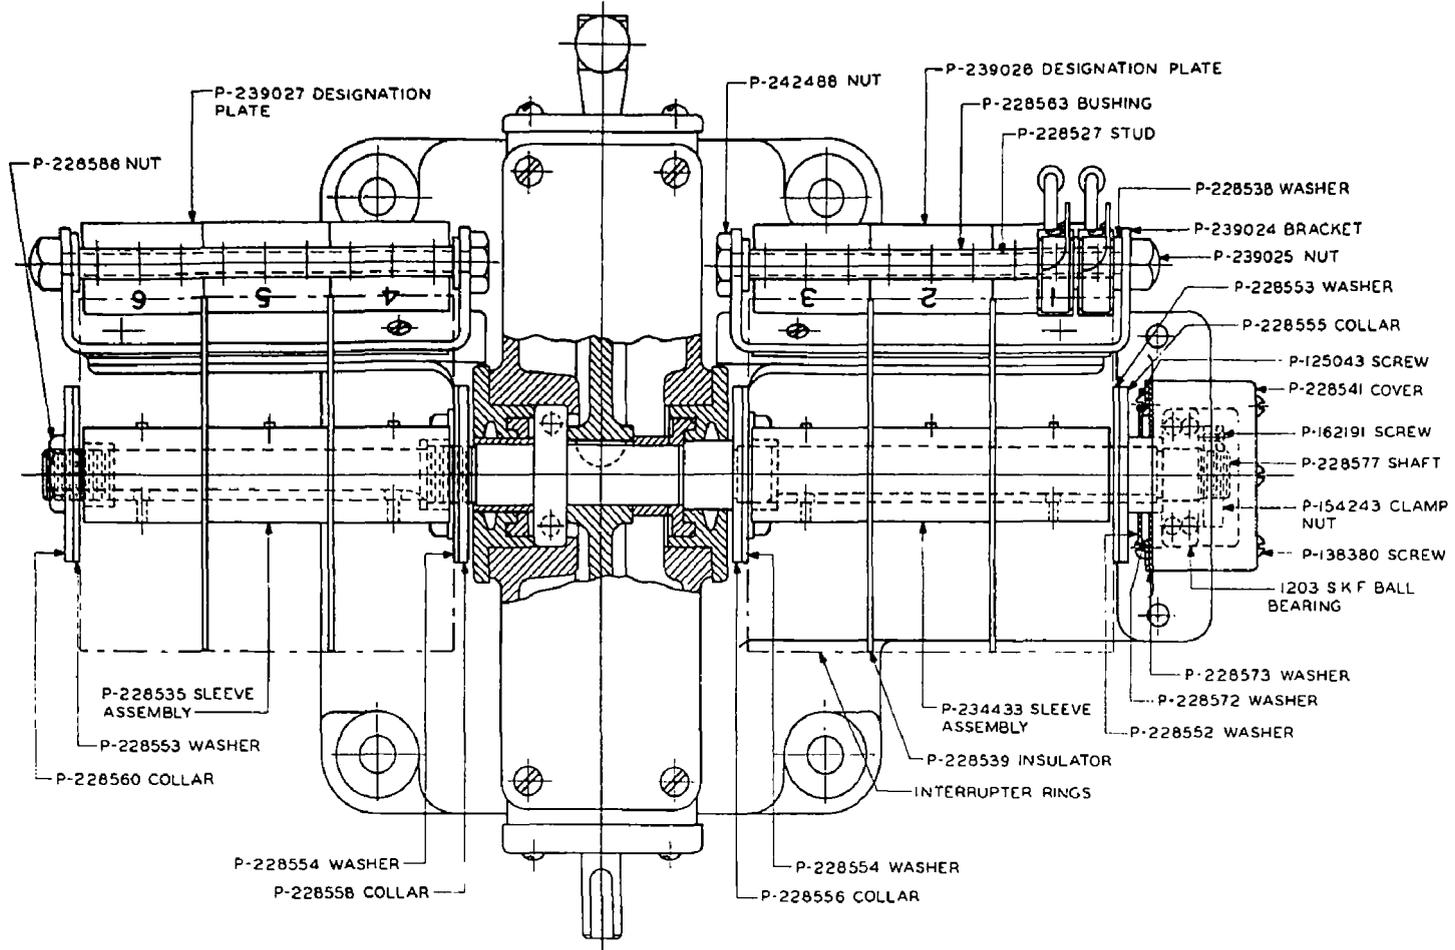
B Interrupter Mounting—Top View (For Side View See Fig. 5)
